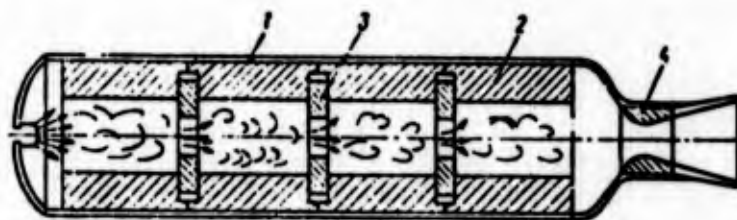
Chamber of a GRD with a sectional charge: 1 - housing; 2 - charge of solid component; 3 - throttle disk; 4 - nozzle.
